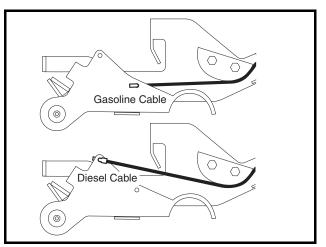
17 Z-Shaped Cable End in Hole at Pedal
